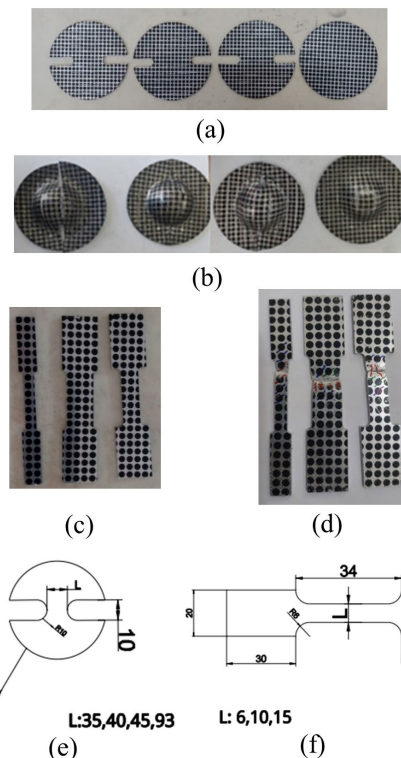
Samples for FLD: Nakazima samples; (a) before the test, (b) after the test, tension samples; (c) before the test, (d) after the test, (e) dimension of tension samples, and (f) dimensions of Nakazima samples.
